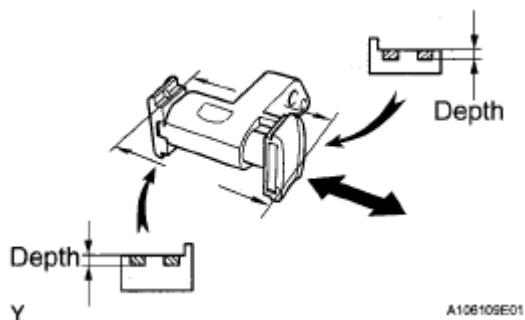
Identifying Worn Depth Of No. 3 Chain Tensioner
